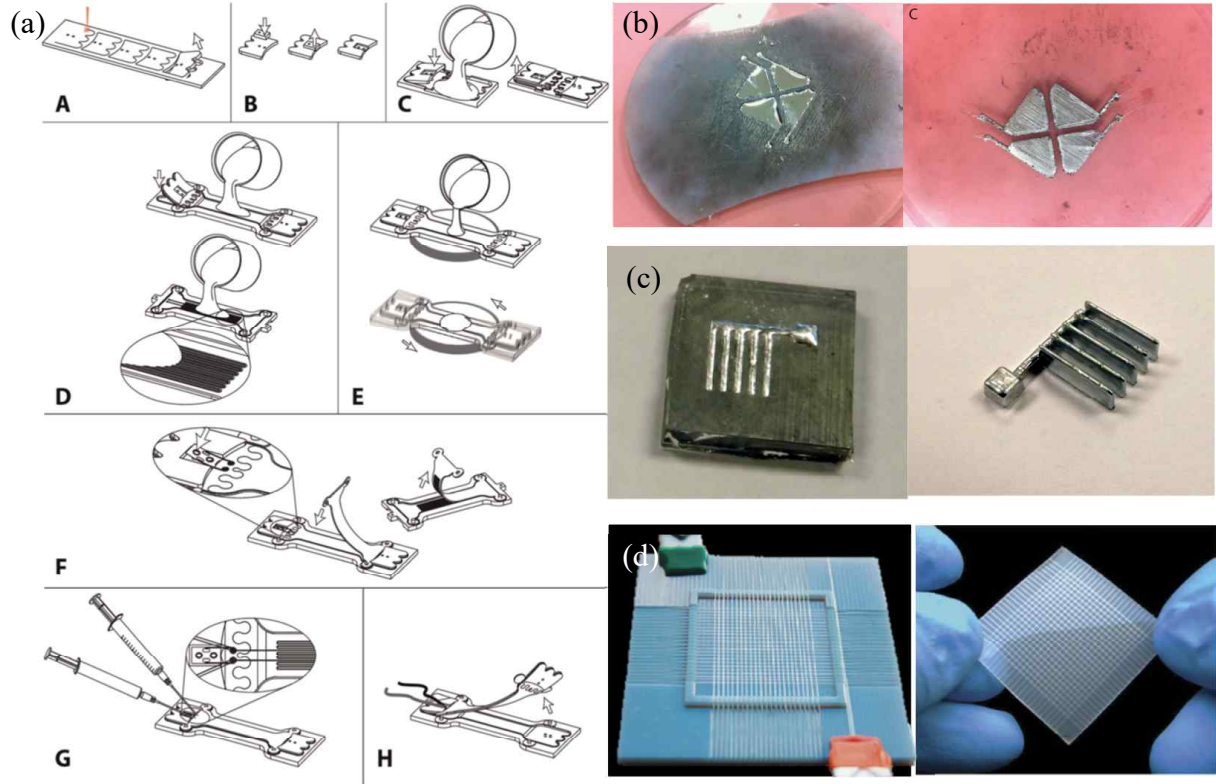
Fabrication methods for liquid metal-based soft sensors: (a) molding, bonding, and injection [117], (b) mask deposition [148], (c) freeze casting [52], and (d) direct filament casting [105, 104].
